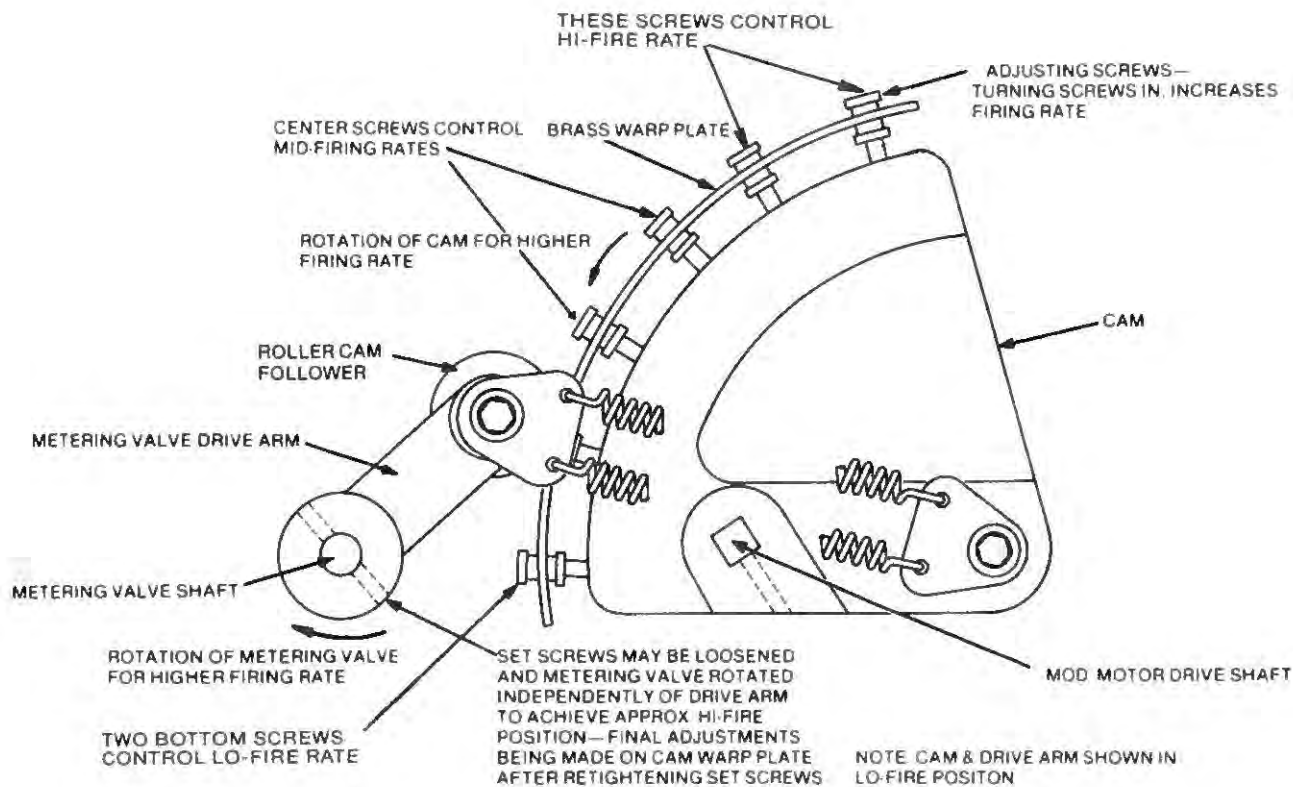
OIL METERING VALVE DRIVE ADJUSTMENTS -
